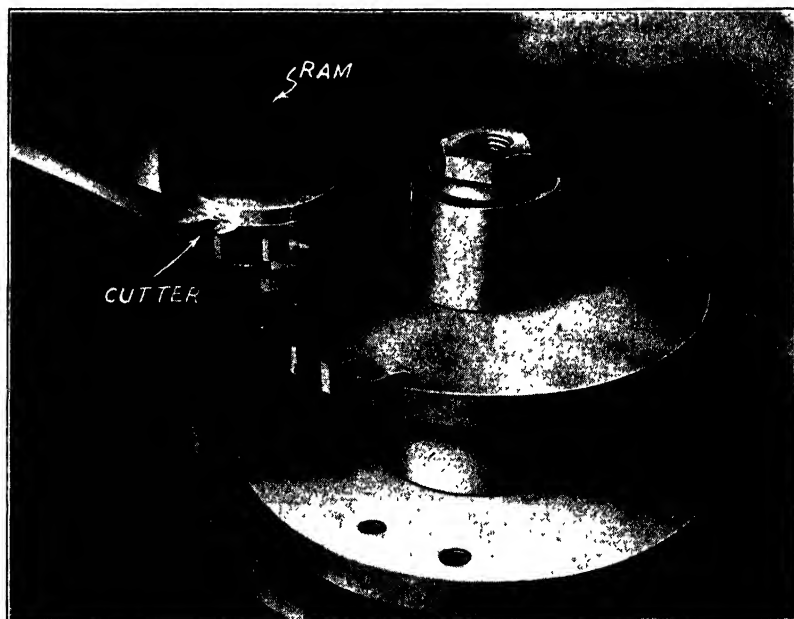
Cutting or Generating the Teeth of a Spur Gear
